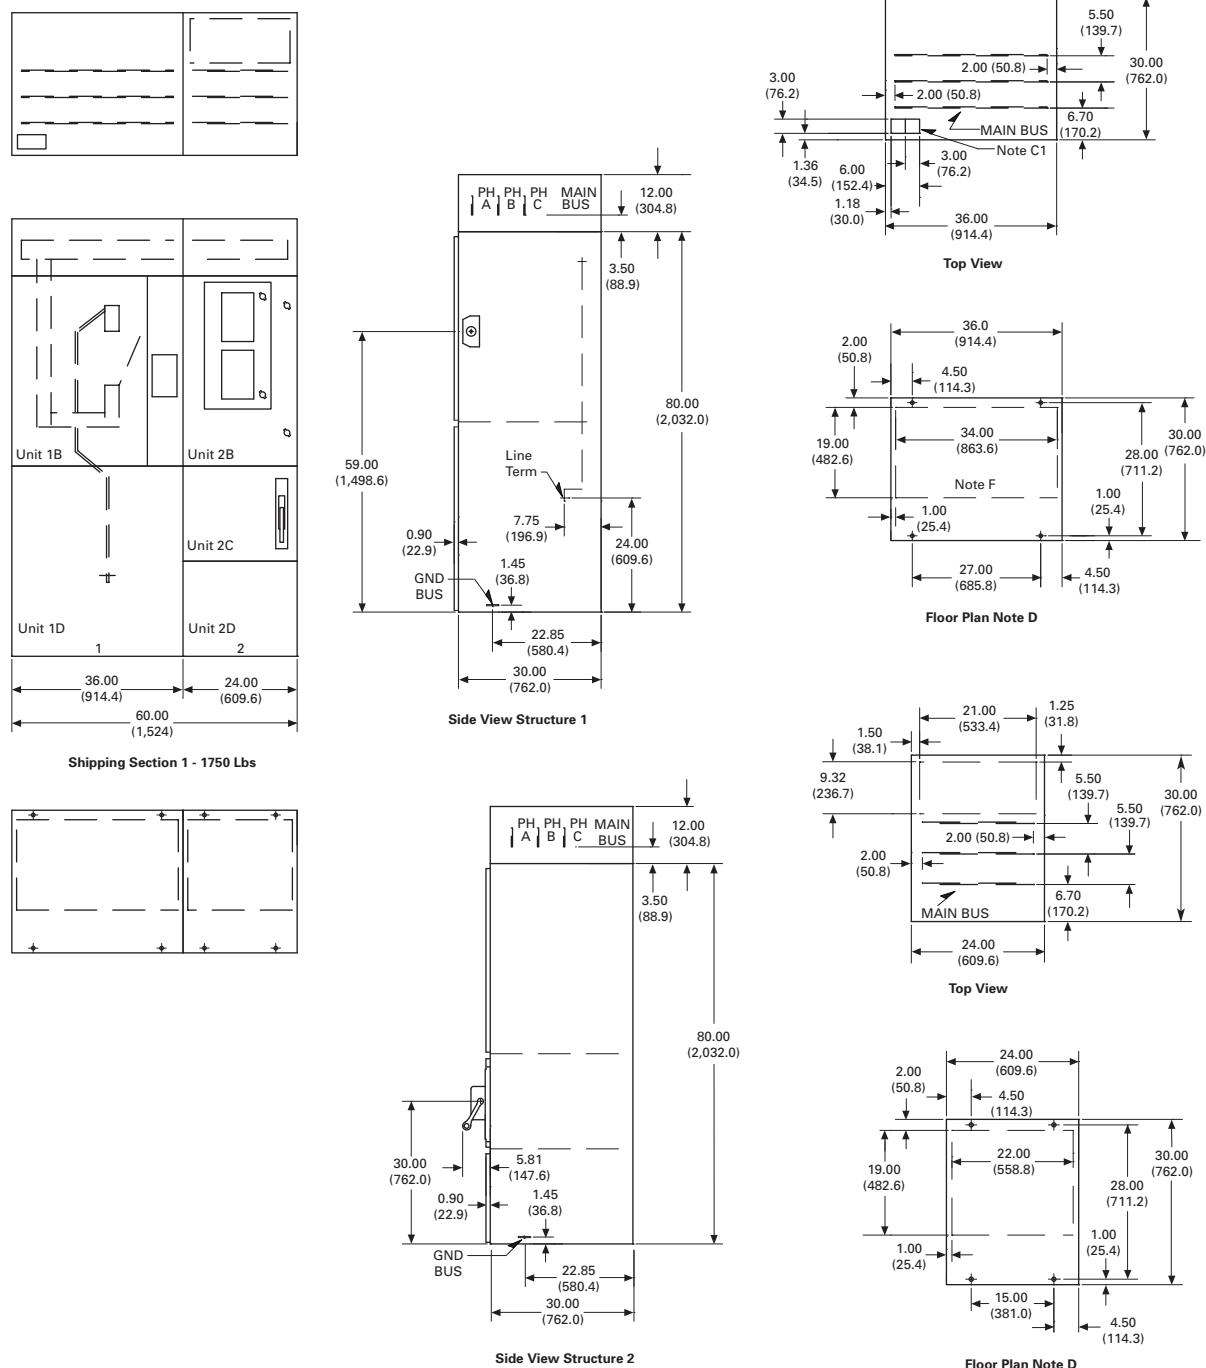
Incoming LBS, Bottom Entry up to 450 A Fuse, Unfused with Metering Section
